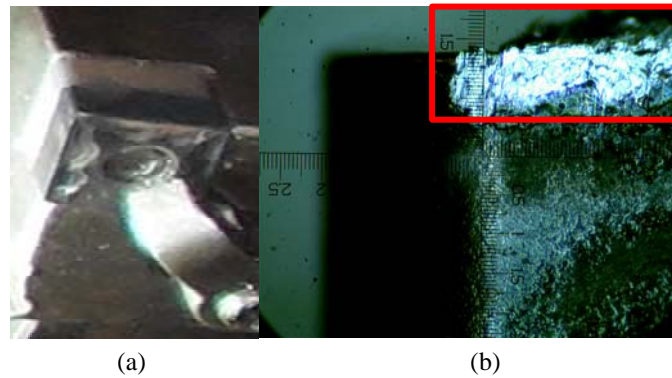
Tool wear. (a) Tool used for processing. (b) Wear in tool.
